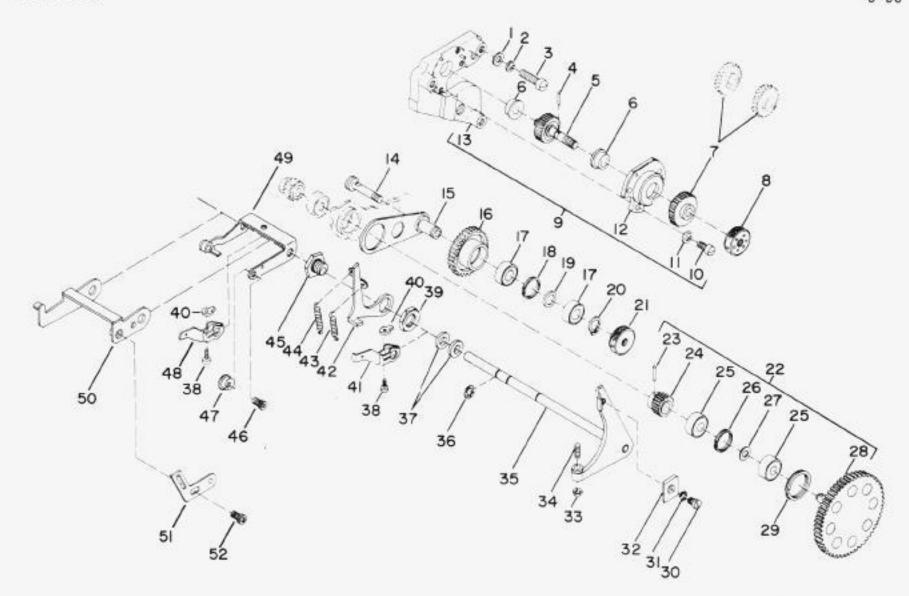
Motor (60 Cycle) and Gearhead Assembly
